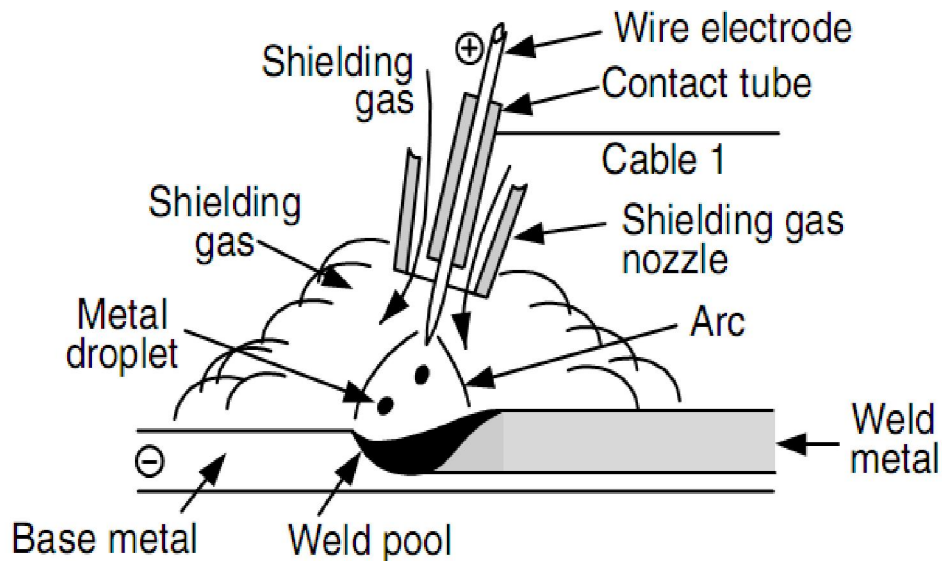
A schematic of Gas Metal Arc Welding Process [4]
